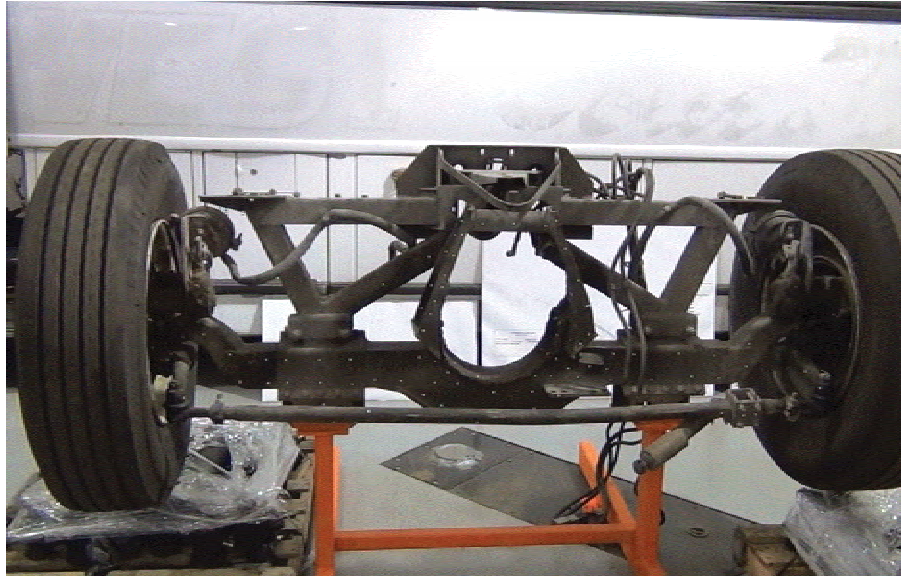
Americanos 60630 Driveshaft Escape Gouging Marks
